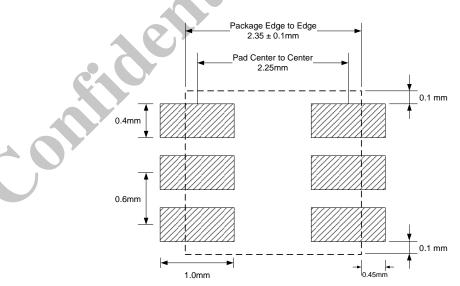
CM32181 OPLGA PCB Layout Footprint
